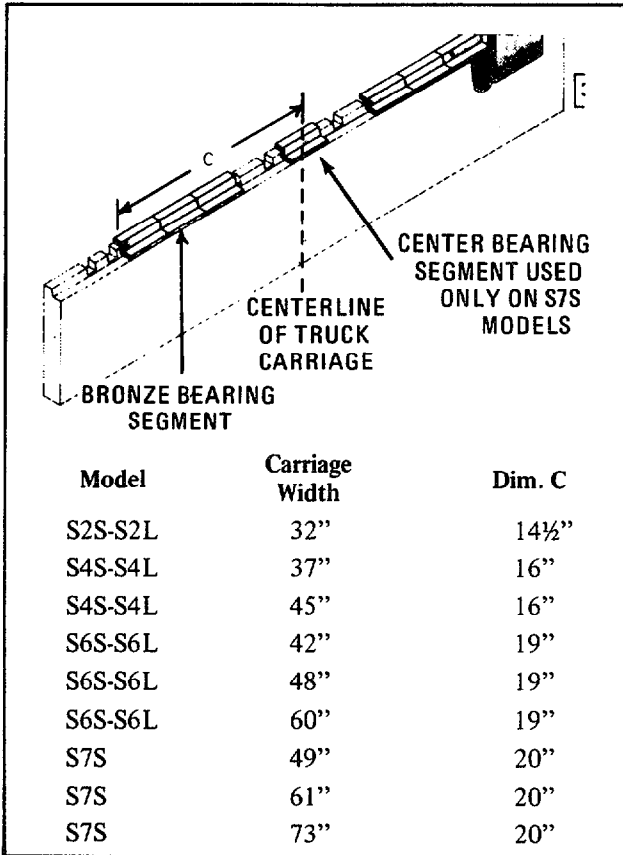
BEARING MOUNTING DIMENSIONS
